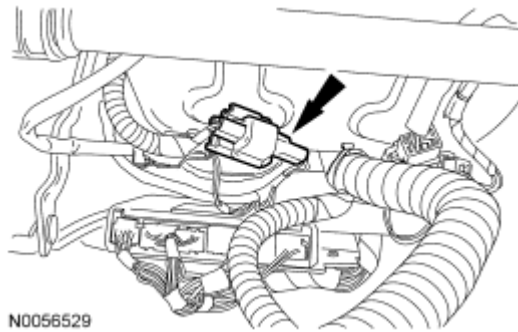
Identifying Driver Seat Side Air Bag Module Electrical Connector Locking Clip
